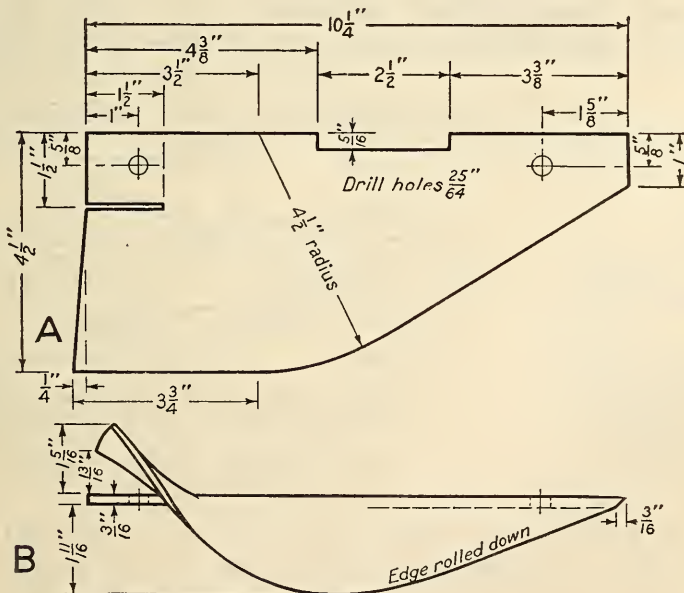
Elevating chute, McCormick-Deering corn binder
